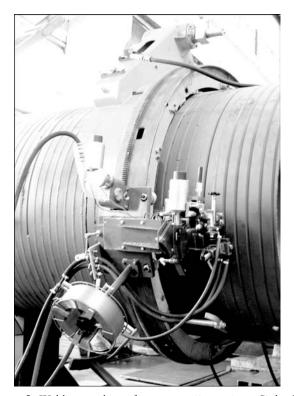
Welding machine of new-generation system «Styk» for automatic arc flux-cored wire position butt welding of large-diameter pipes with forced weld formation (manufacturer – OJSC «Ka-khovka Plant of Electric Welding Equipment»)
